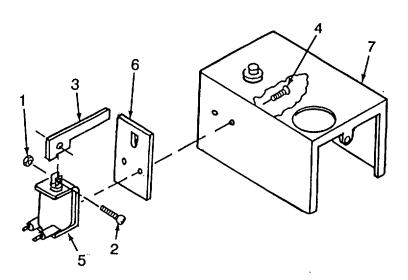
Combustor Control Relay Assembly/Disassembly
